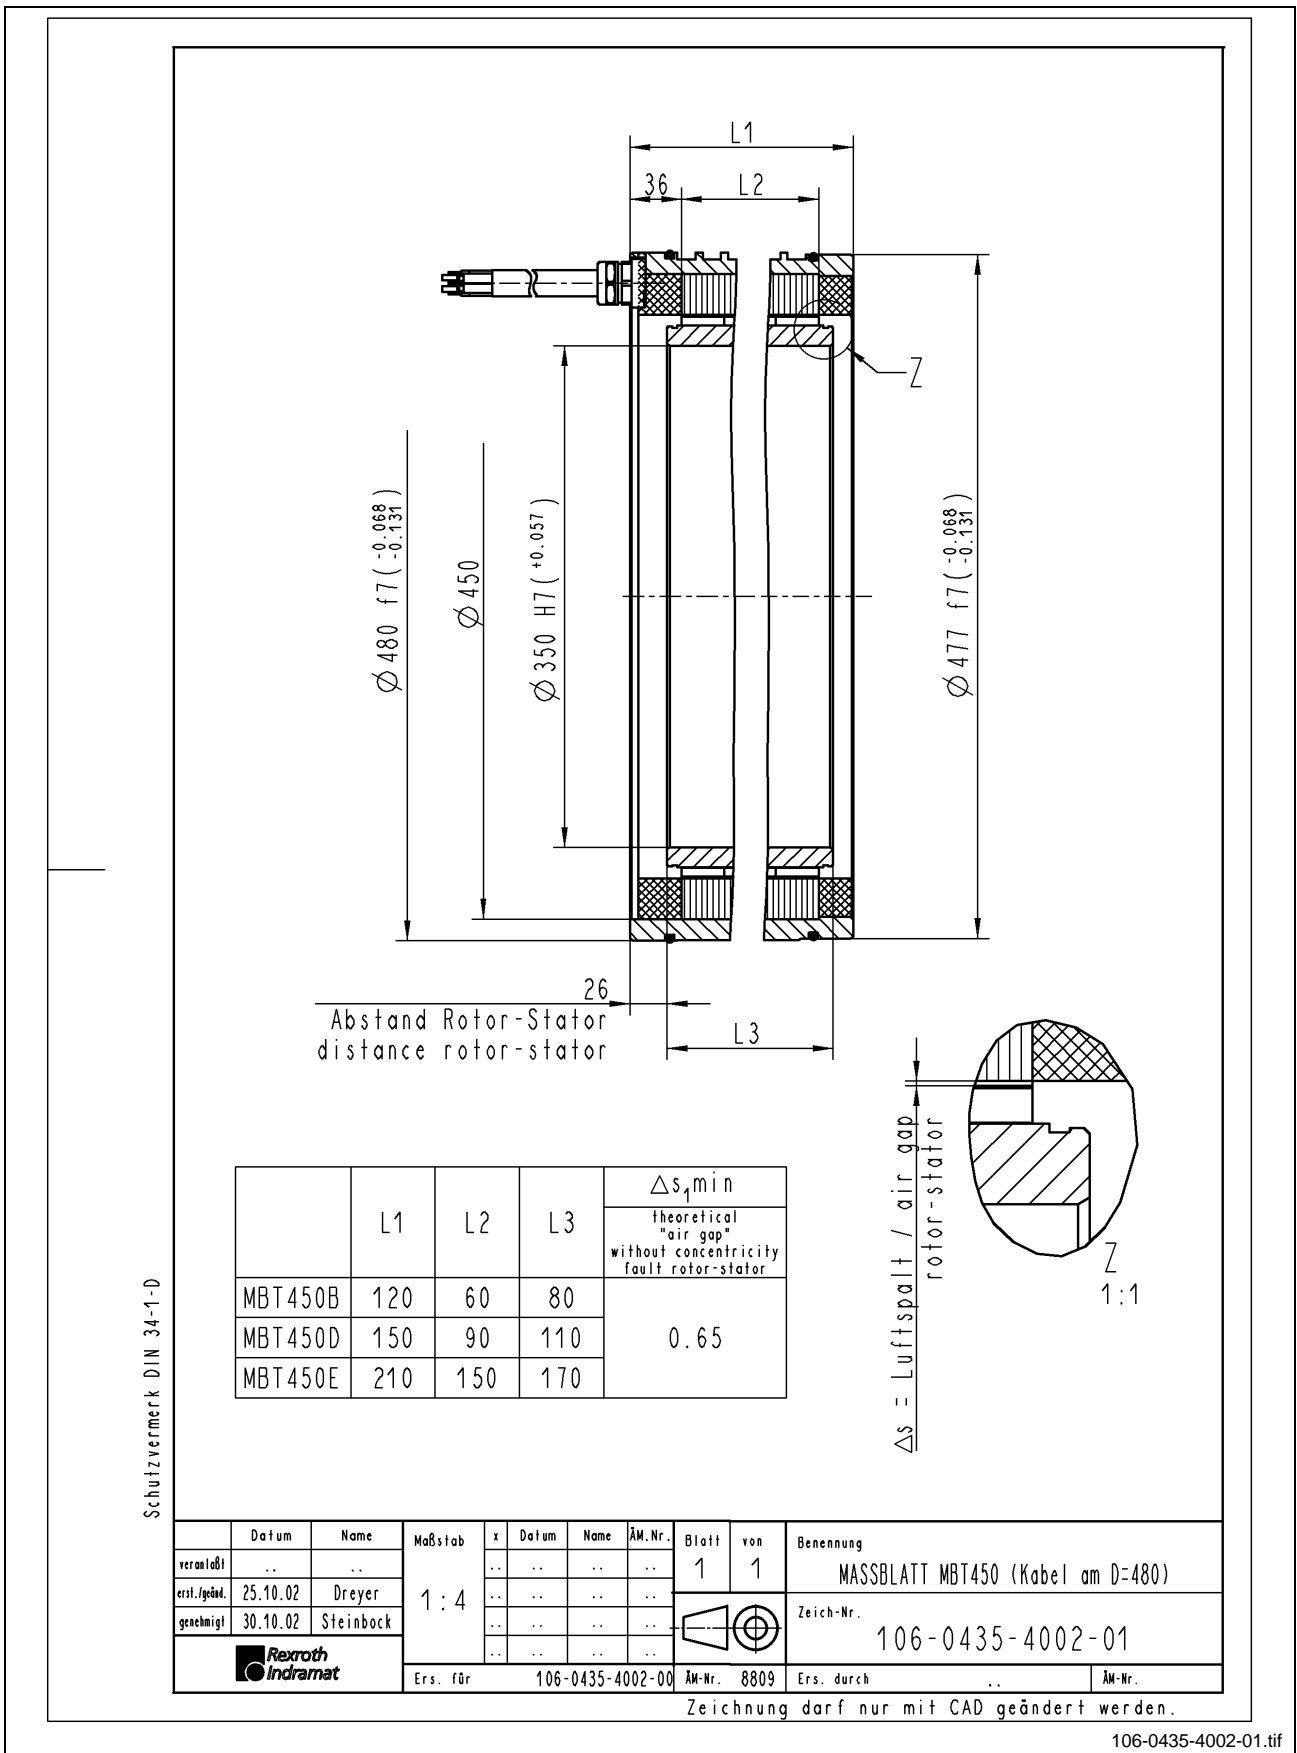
Dimension sheet size 450, electrical connection "CN"
